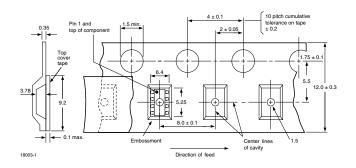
Tape Dimensions, 2000 Parts per Reel
